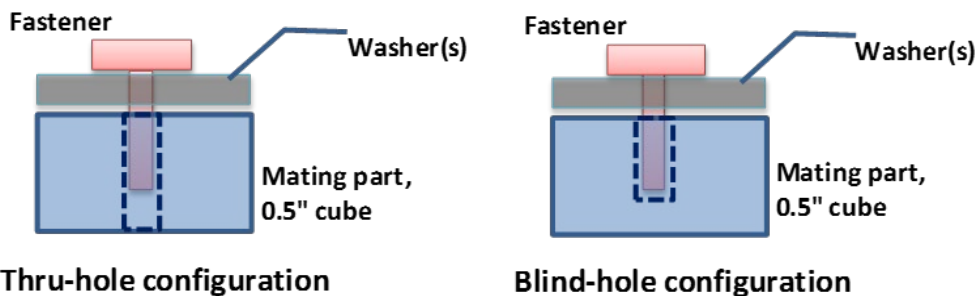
Schematic diagrams of torque specimen assemblies per hole configuration
